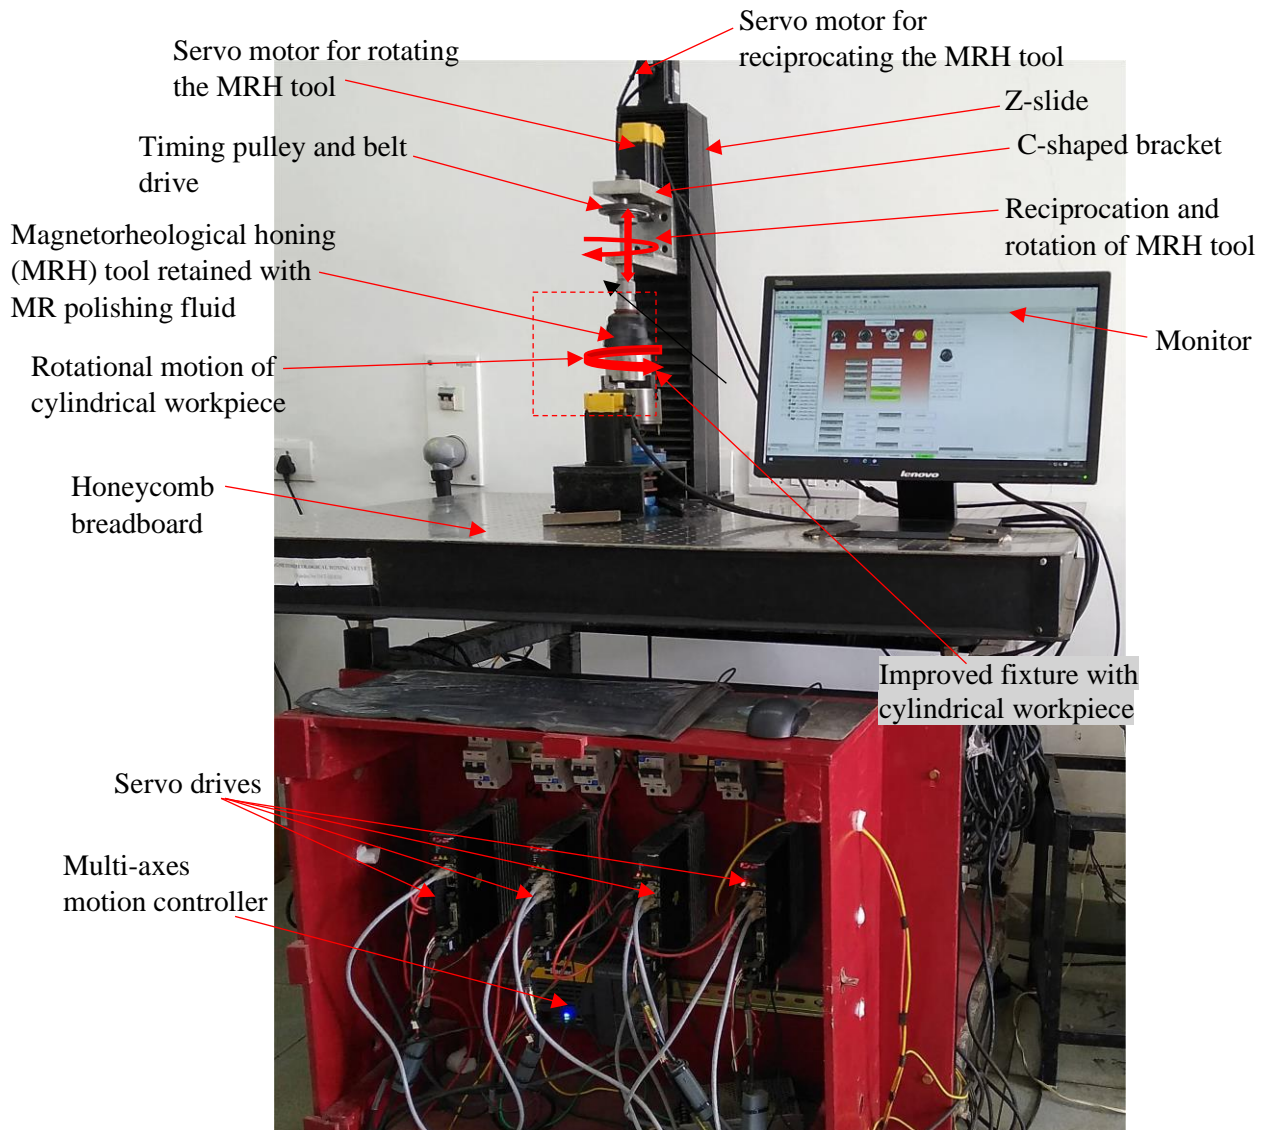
The R-MRH setup along with the improved fixture for finishing the internal surface of the cylindrical workpieces of variable diameters.
